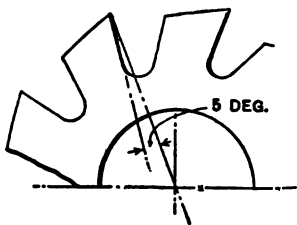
High-speed milling cutters should have about 5 degrees of slope to the cutting lips.
